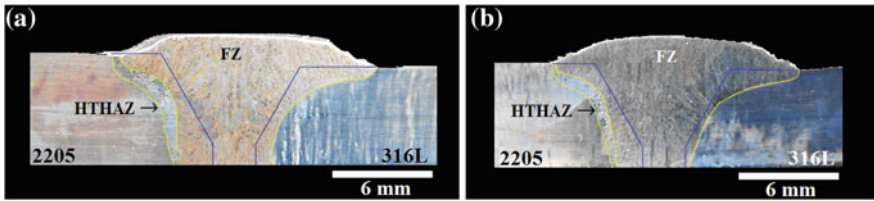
Macrographs of the transverse views of the welded joints; a 0 mT and b 3 mT
